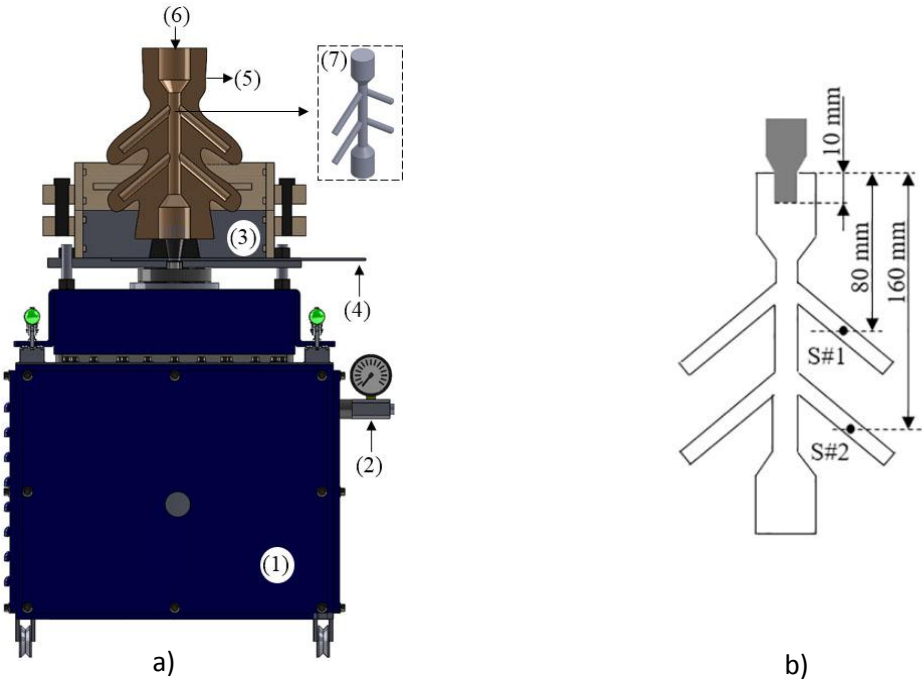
a) Experimental set-up for the low-pressure investment casting process : (1) Melting chamber; (2) Argon inlet; (3) Moulding box to stand the ceramic shell; (4) Liquid column cutting plate; (5) Ceramic shell; (6) Feeder to insert the refinement acoustic radiator; (7) Wax mould
